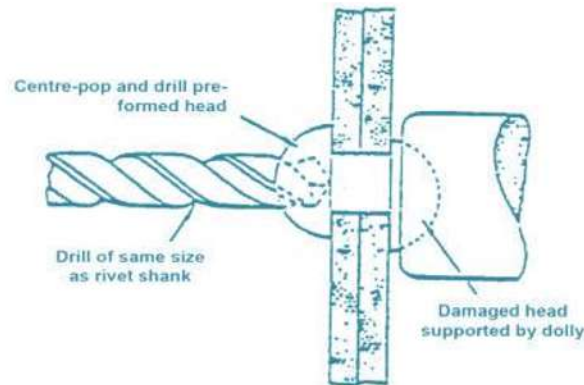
Removal of snap-head rivet Riveted Joints
